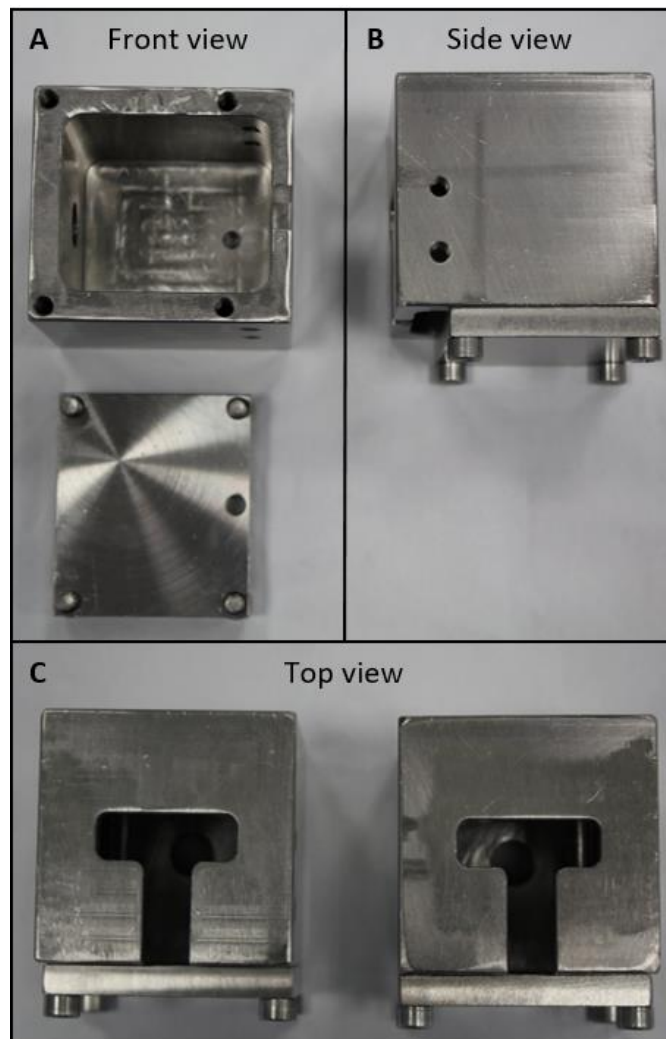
The bespoke fixation device manufactured for the testing of the LCL complex. A) shows the front view of the pot with front cover detached. B) shows a side view of the assembled pot. C) shows the top view of the pot when arranged for testing the T-shaped slots are on opposing faces.
